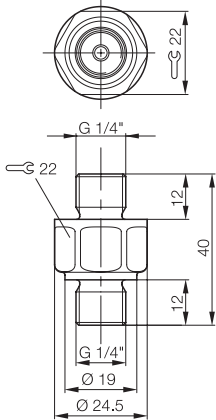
Dimensioned drawing of flush-mounted pressure sensors, 100 bar or higher
